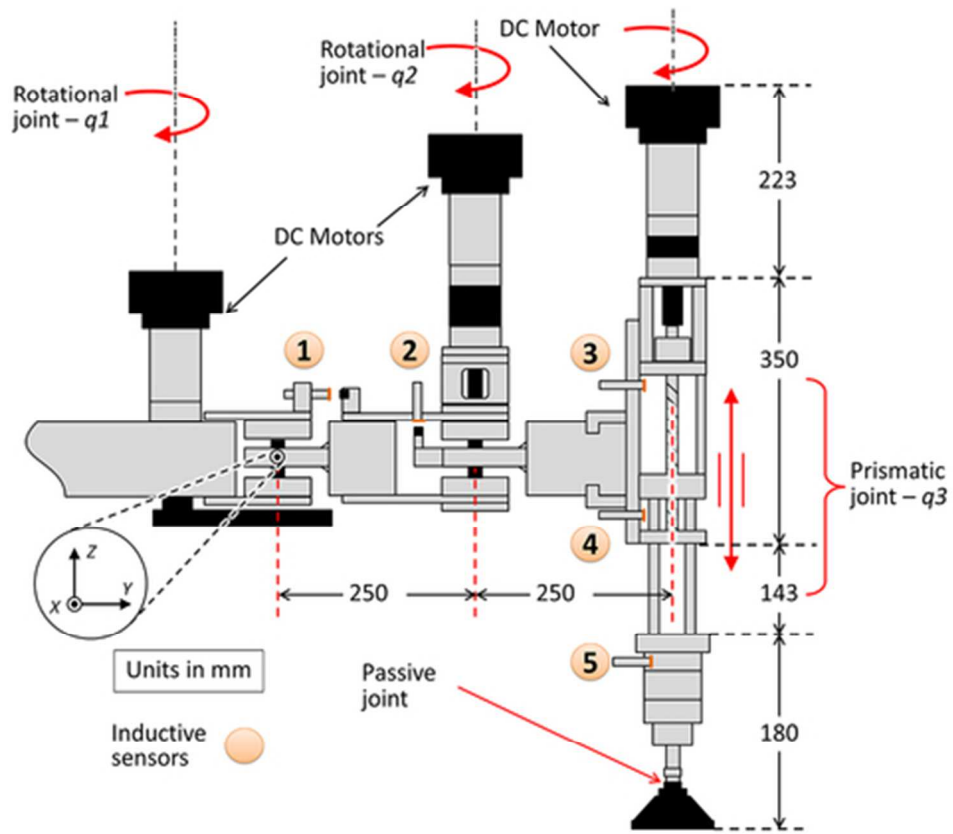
Mechanical configuration of the hexapod robot (units in mm). (b) Frontal view of the leg.
